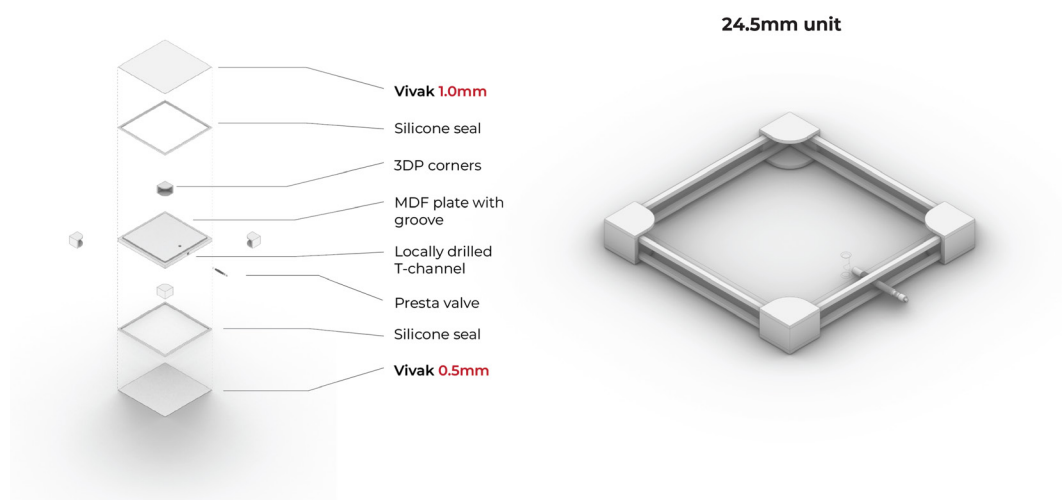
| Left: Exploded view of the individual components - Right: isometric drawing of the final setup (author)
